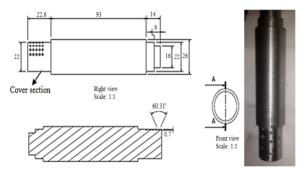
The drawings (sizes in mm) and the selected tool for abrasive finishing of the drilled holes.
